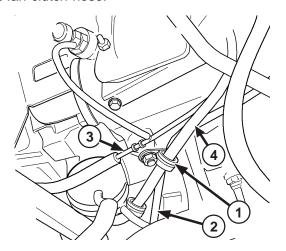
Fuel Lines and Wiring Harness Clamps Removal
